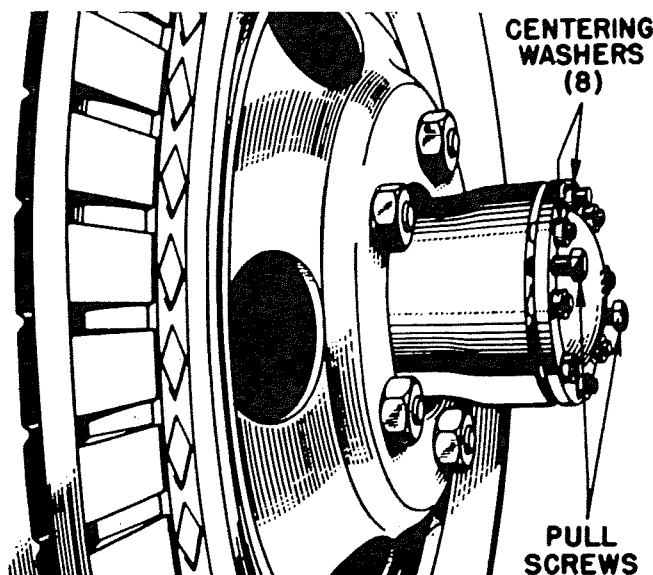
Group No. 114 Removing Axle Shaft from Ford Truck
